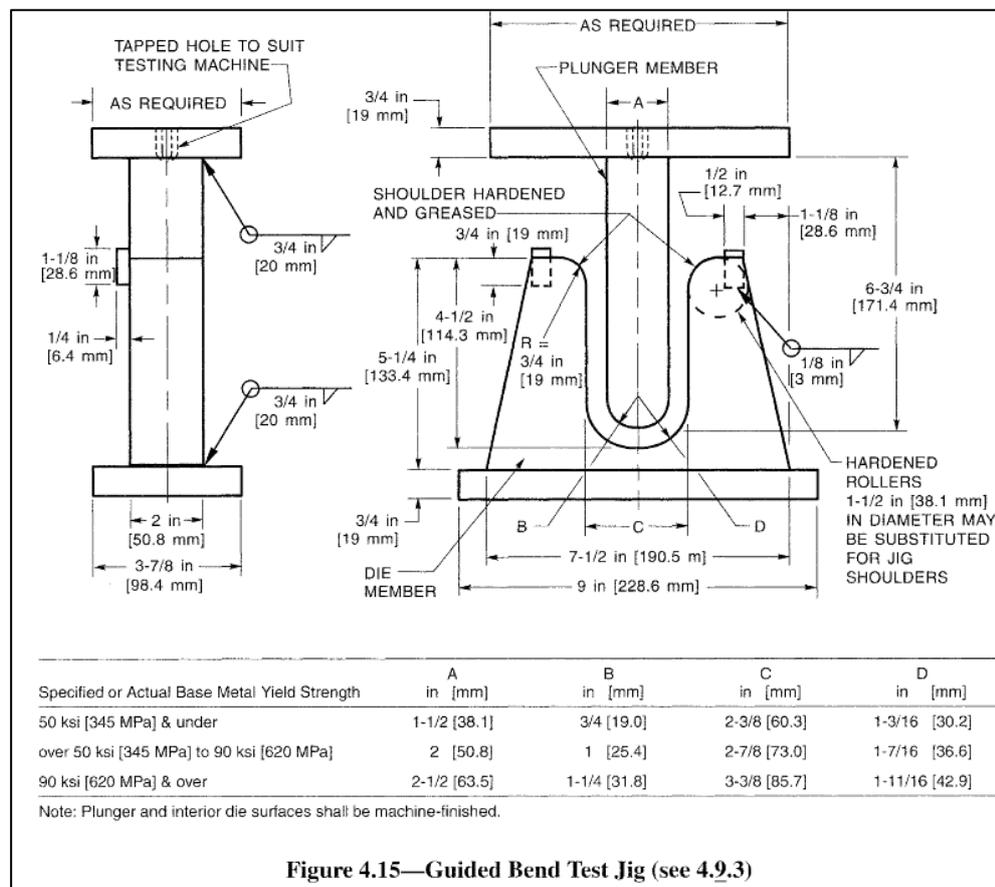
Guided Bend Test Jig (see 4.9.3)
